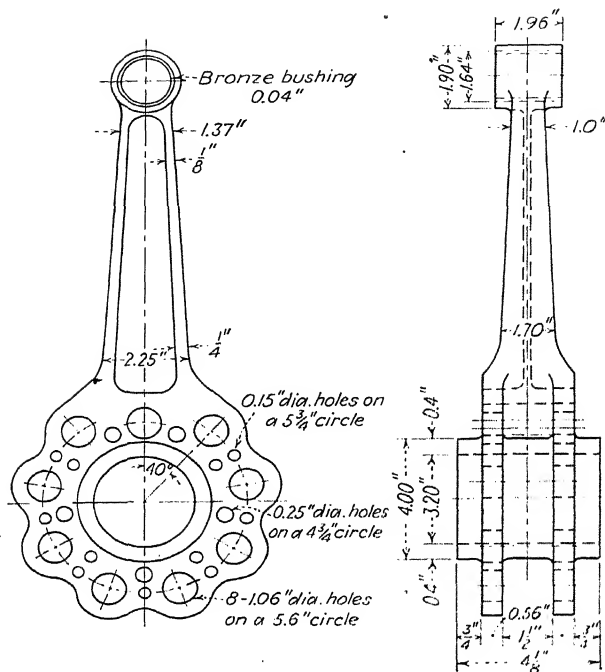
Master connecting rod used in the Wright 1820 Cyclone engine.
